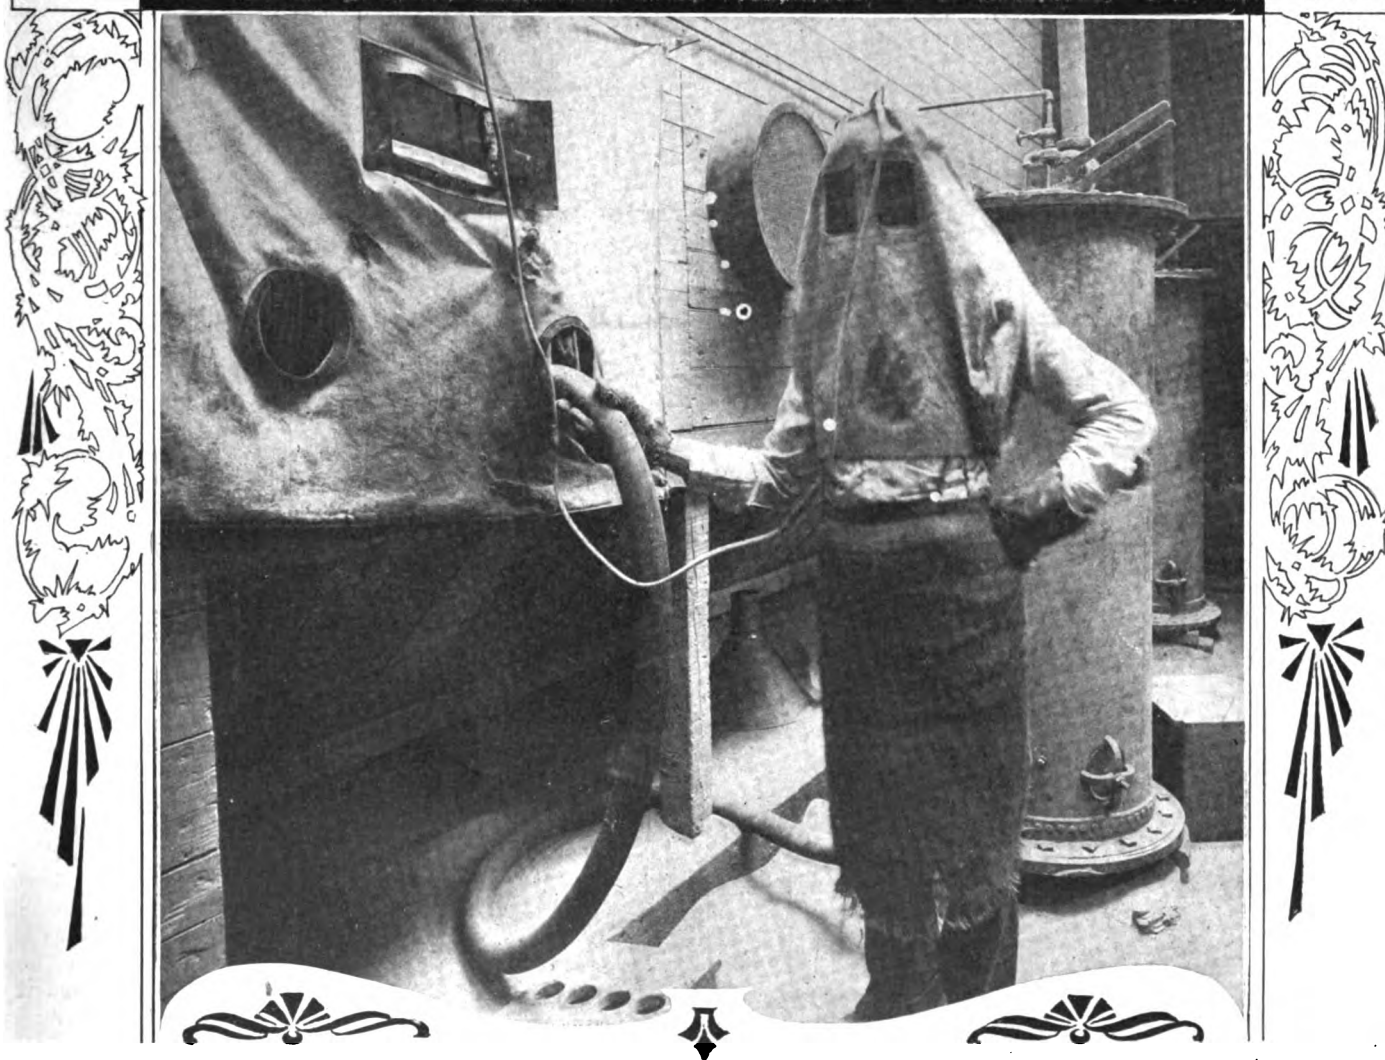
SAND-BLAST EQUIPMENT VALUABLE FOR UNCOVERING DEFECTS IN FORGINGS AND OTHER PARTS, REMOVING THE SCALE, ALSO THE PRELIMINARY TO HIGHLY FINISHED WORK
